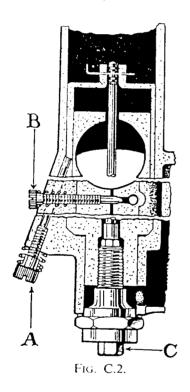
is a three-section diagram of the carburetter showing the throttle adjusting screw (A), and the pilot air adjusting screw (B).
